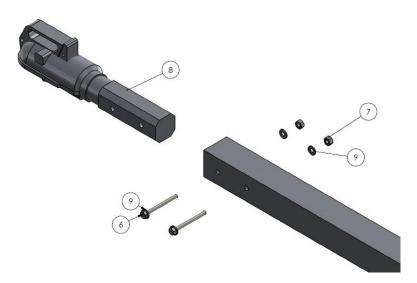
Assembly diagram of mounting the swivel hitch to the aluminum frame (safety chain not shown)
